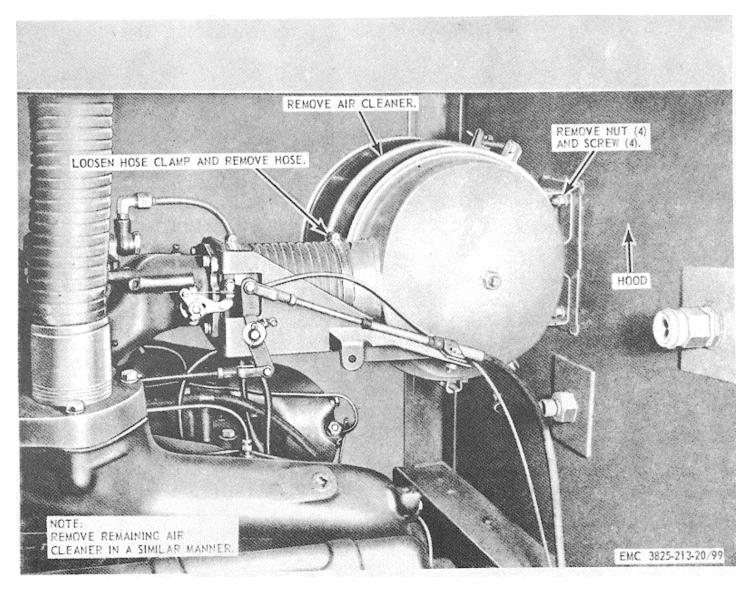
Plow and carrier engine air cleaner assembly, removal and installation.
